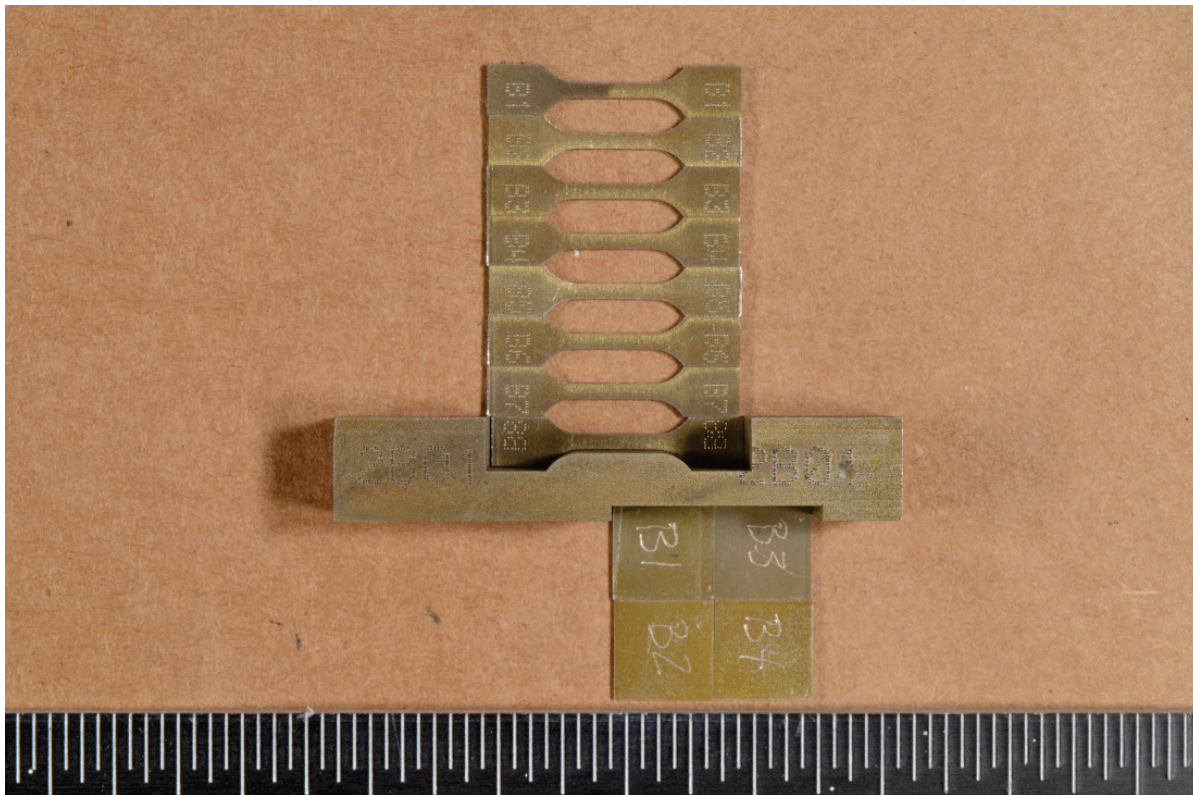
CVN blank – 2B01. CVN blank cutting plan with labeled specimen example [17].
